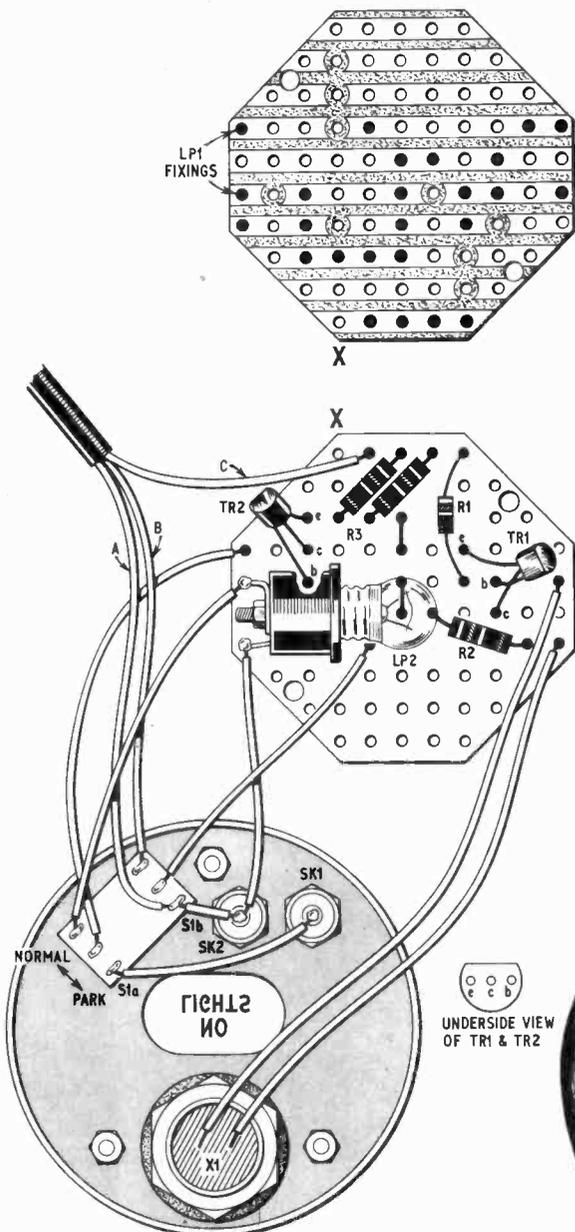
Layout and wiring diagram of the prototype unit housed in a tobacco tin case. This is the negative earth system; for positive earth version the wire connected to S1b wiper is removed and reconnected to SK2, link between SK2 and S1b is removed. Wire "C" is taken to S1b wiper and a new wire—which now becomes "C"—is connected to SK2
